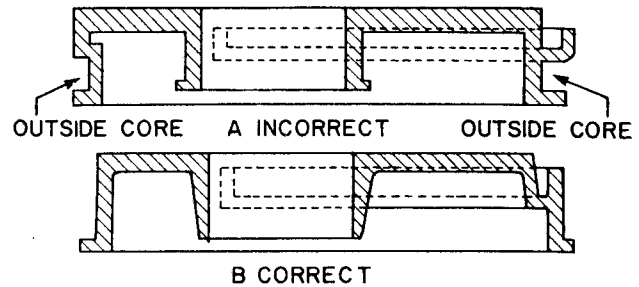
Redesign to obtain uniform sections and eliminate core.
